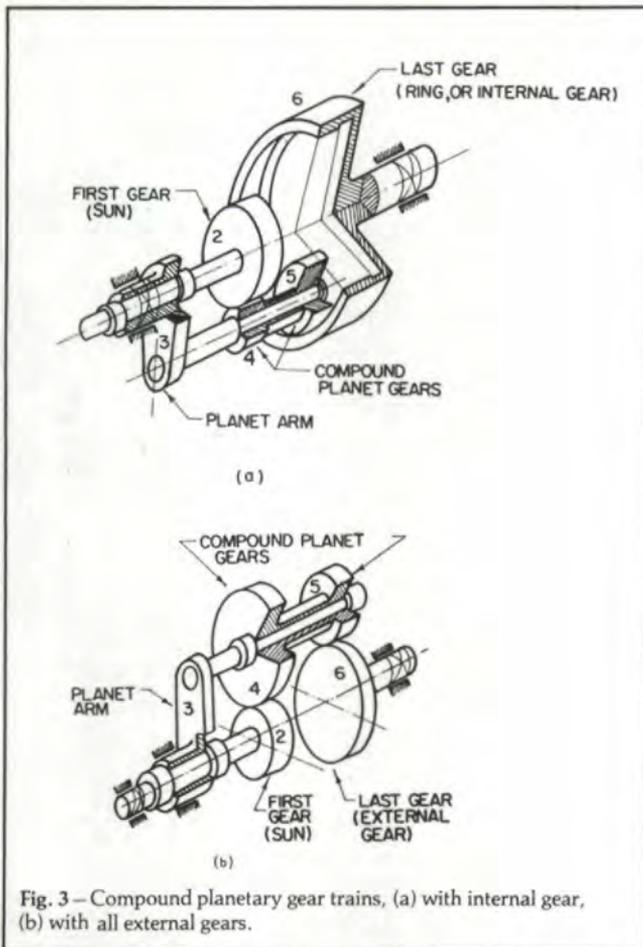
Compound planetary gear trains, (a) with internal gear, (b) with all external gears.
